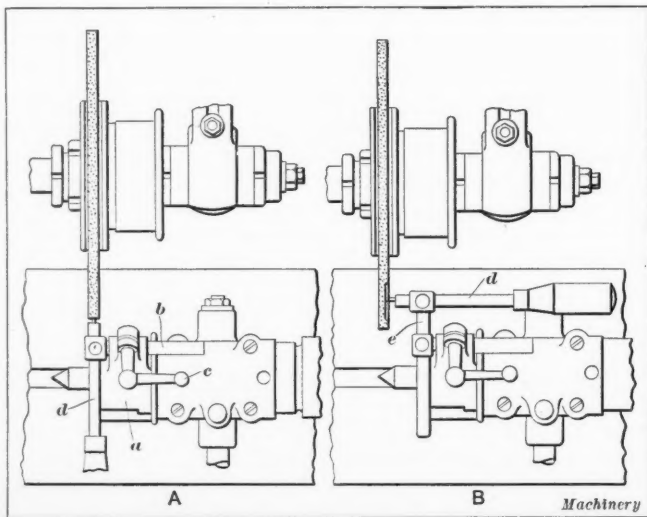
Common Method of truing Face and Sides of Grinding Wheel
